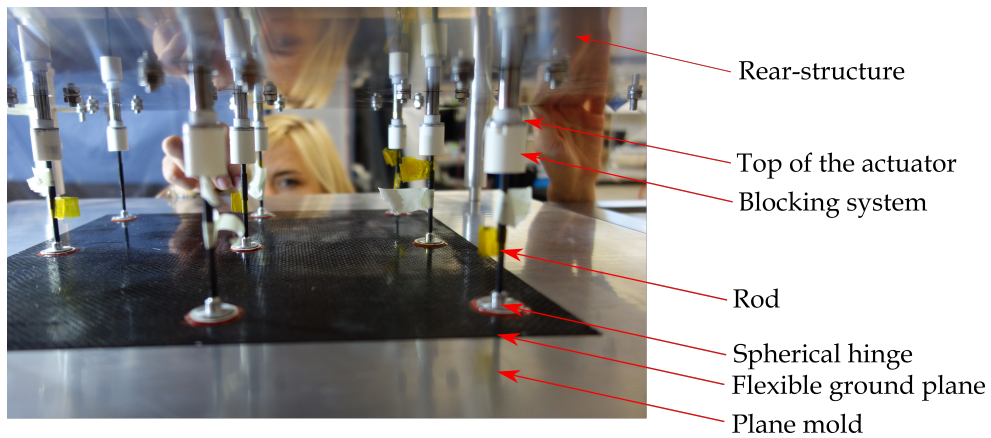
Assembly process of the actuators, the membrane and their interfaces.
